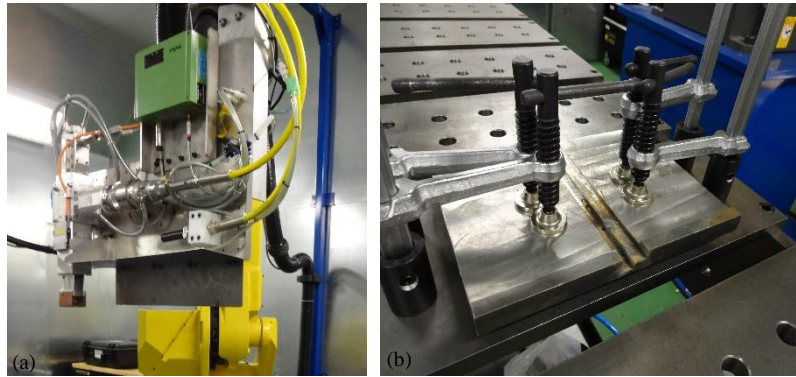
Experimental set-up showing (a) laser and (b) clamping system
